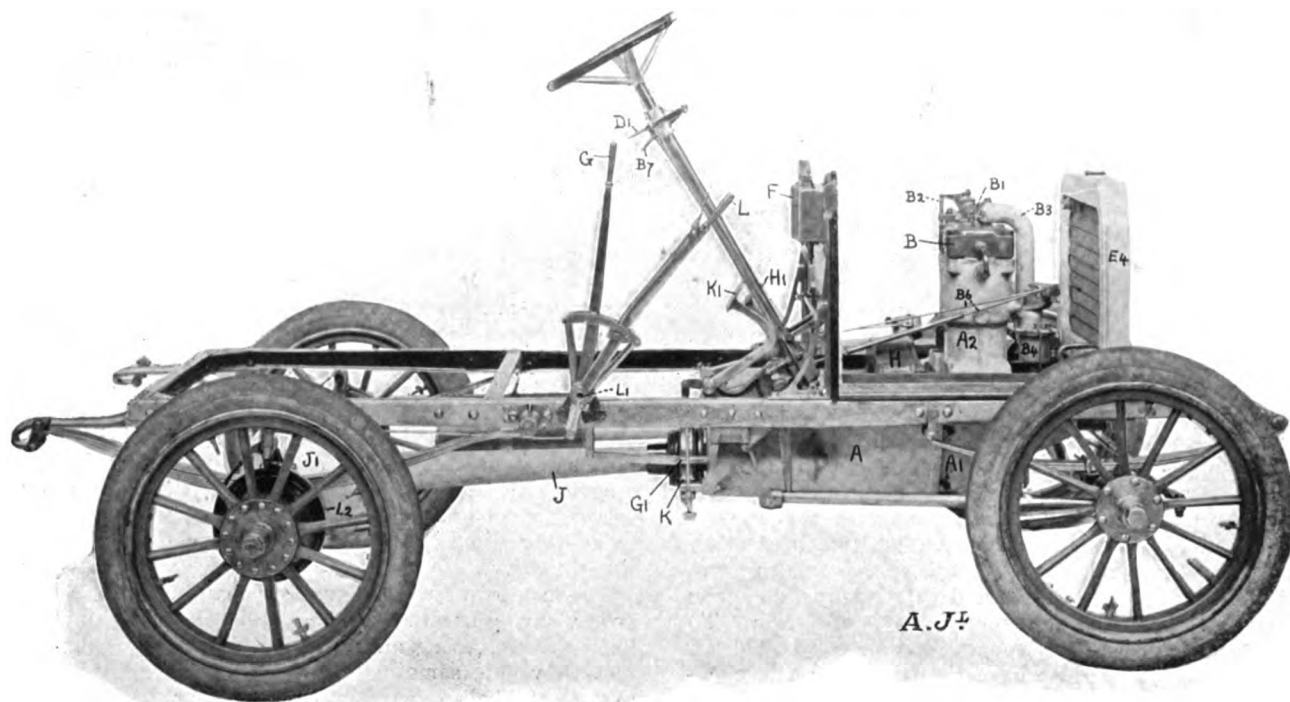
Side view of the 6-h.p. Siddeley Chassis, showing the simple arrangement of the well protected Driving Mechanism.
